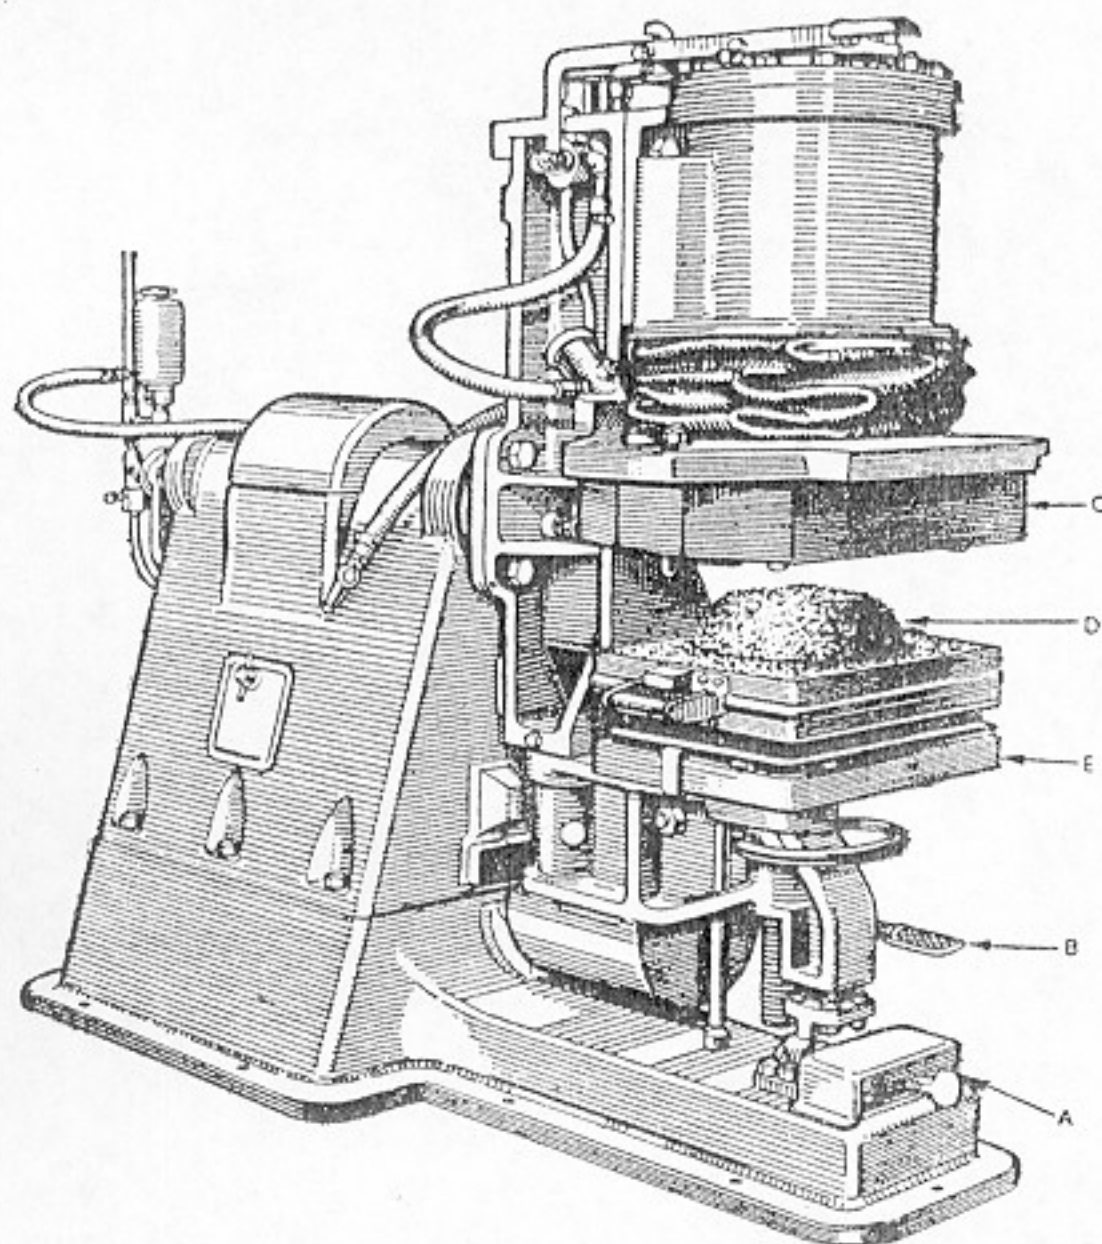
Pneumatic machine in turned-over position, showing the mold after the pattern has been drawn. A, turn-over lever; B, draw-lever; C, pattern; D, mold; E, squeeze-plate. The mold shown affords a good illustration of the use of the turn-over machine, for it would be difficult to draw the projection, or cod, upward from the pattern without it becoming separated from the parent mold.
